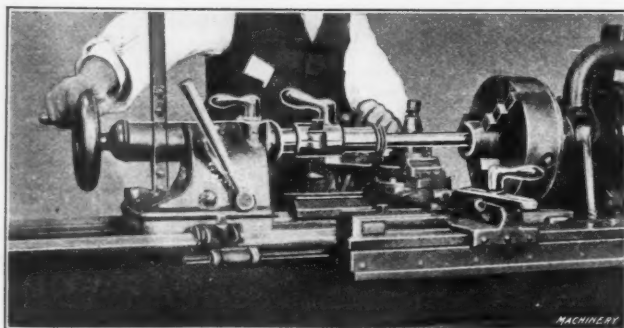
Boring-bar held in the "Satco" Drill Holder
